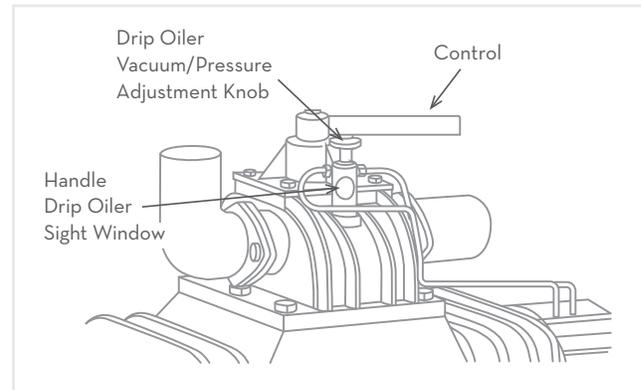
Vacuum Pump Drip Oiler & Vacuum/Pressure Control Handle
